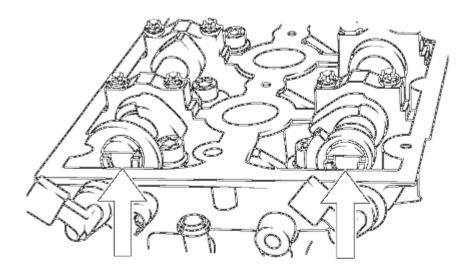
Identifying Alignment Dowel Pins Courtesy of GENERAL MOTORS COMPANY
